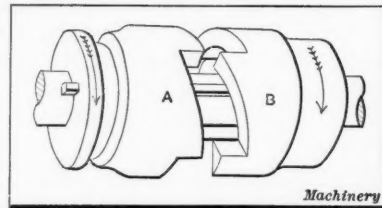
Type of Clutch with Spiral Jaws that caused Levers to be broken
